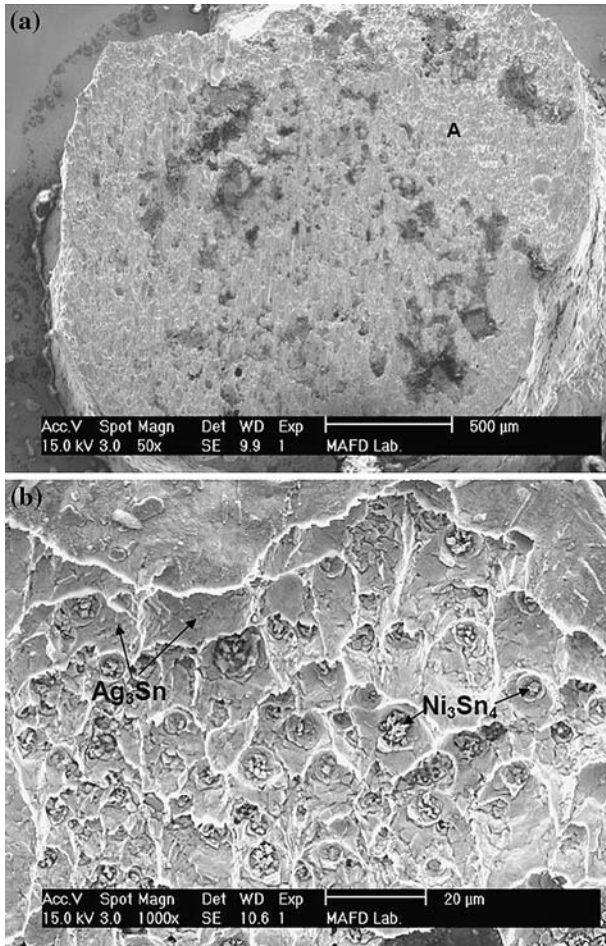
The fracture surface images of Sn-3Ag-4Sb after isothermal storage at 150°C for 625 h: (a) whole fractured solder joint and (b) magnified image of area A.
